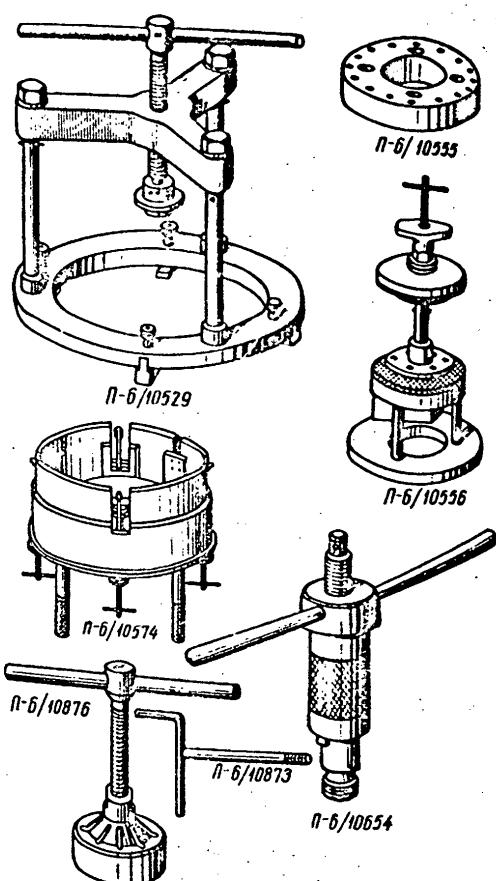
DEVICES FOR CLUTCH ASSEMBLY
